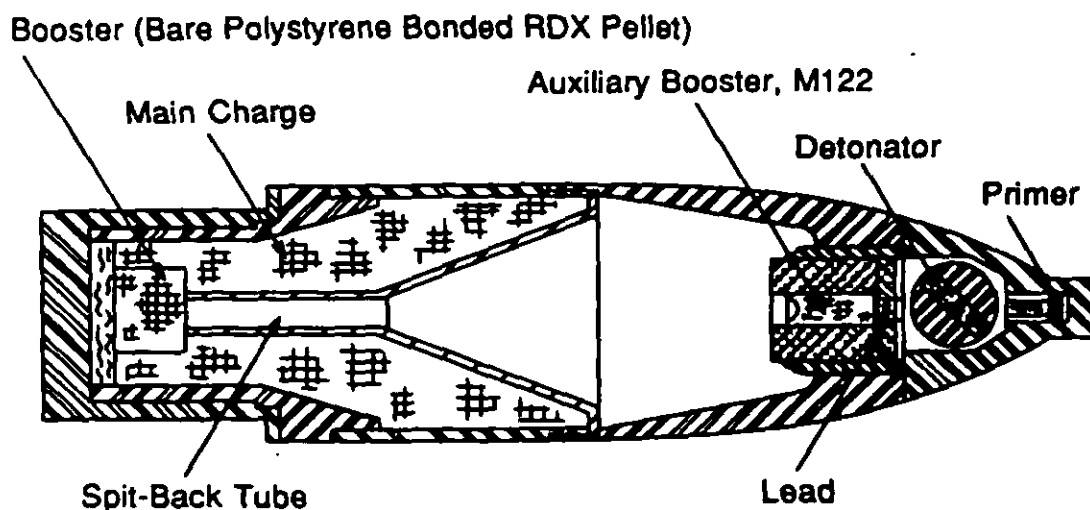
70-mm (2.75-in.) HEAT Rocket With Spit-Back Explosive System (Ref. 21)
